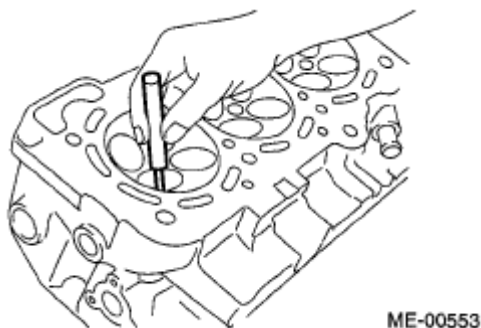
Identifying ST1 18250Aa010 Cylinder Head Table And ST2 499765700 Valve Guide Remover
